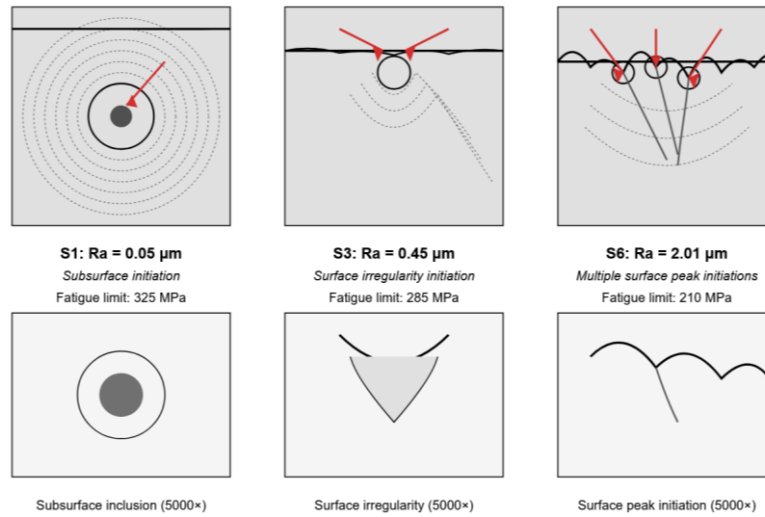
Scanning electron microscope (SEM) fractography of fatigue test specimens
